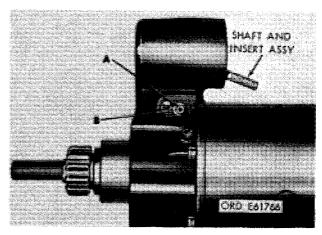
Removing or installing lever shaft retaining screw and washer.
